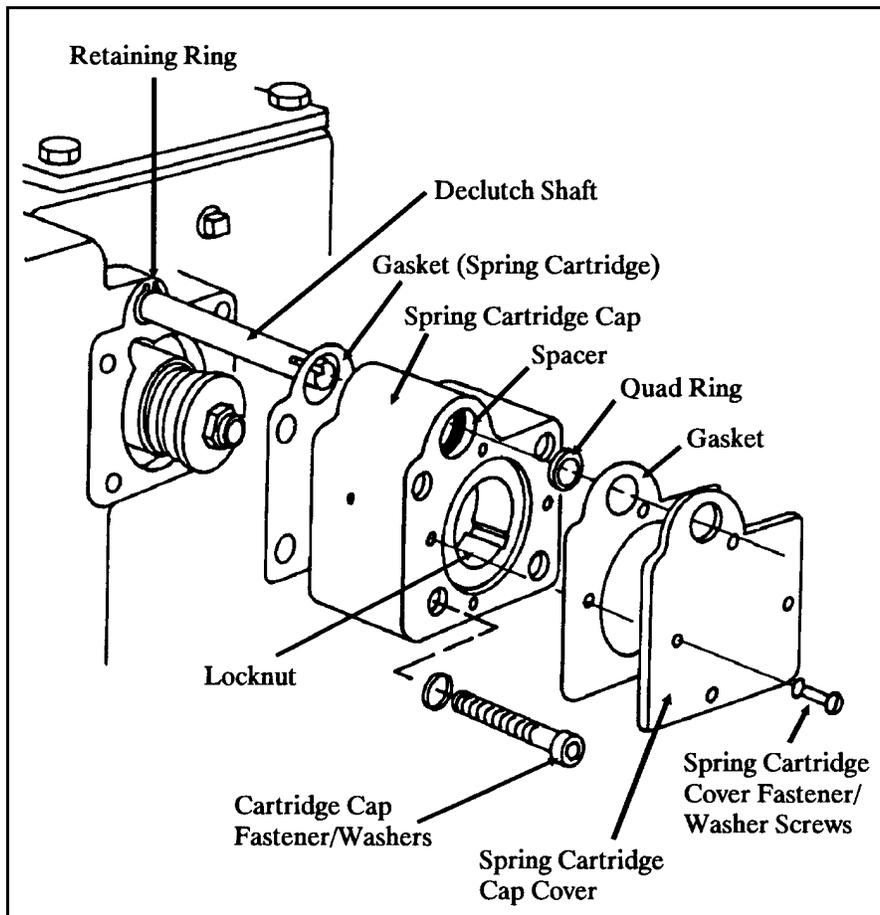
Spring Cartridge Cap Assembly Installation (Old Style)
